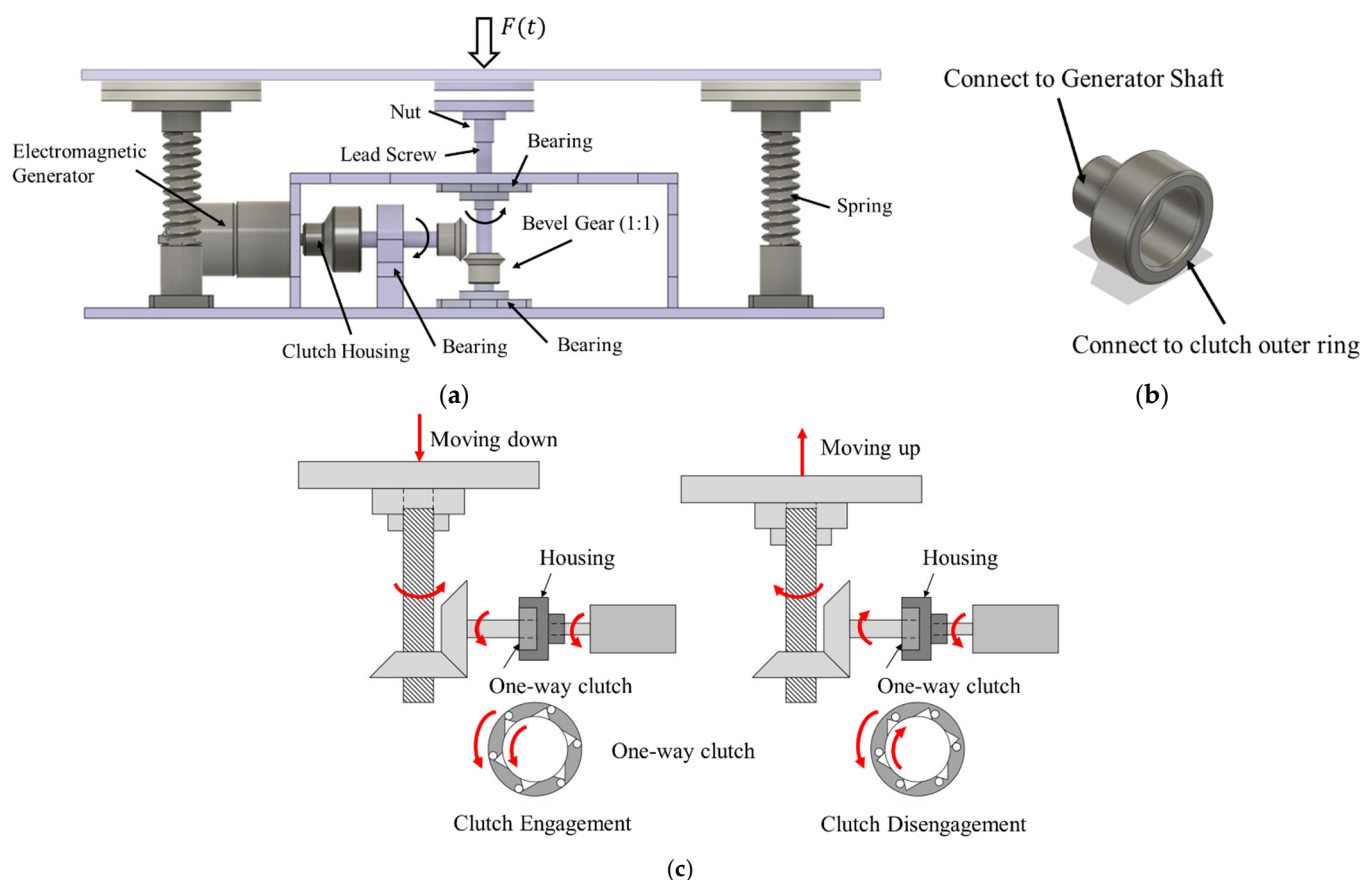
The design of kinetic-energy harvesting floor with the one-way clutch mechanism: (a) schematic diagram of Genpath V2 design; (b) clutch housing; (c) function of the one-way clutch mechanism.
